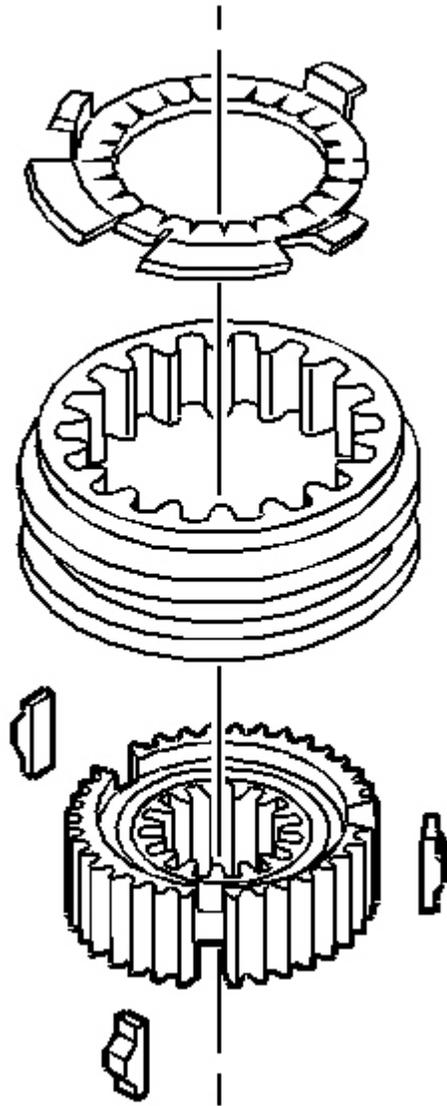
Installing/Removing Synchronizer Sleeve & Keys On Hub
